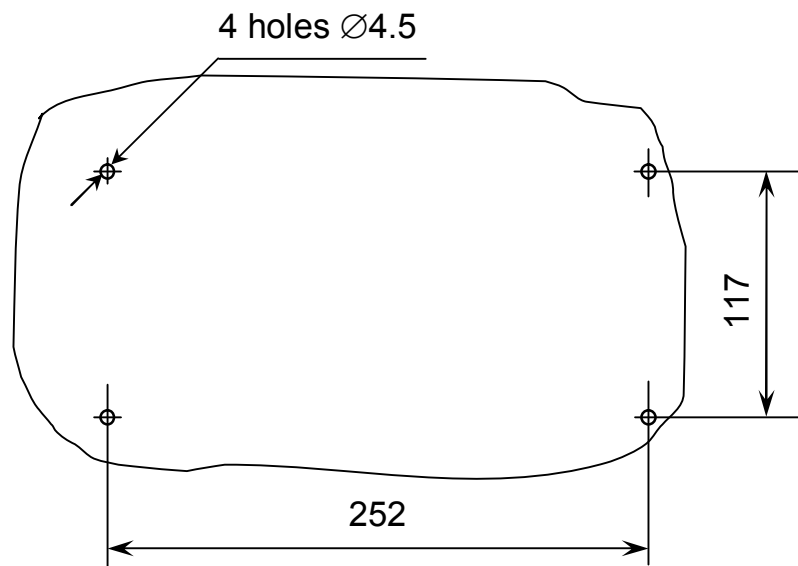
Layout of holes for vertical attachment of a wall-mounted converting unit
